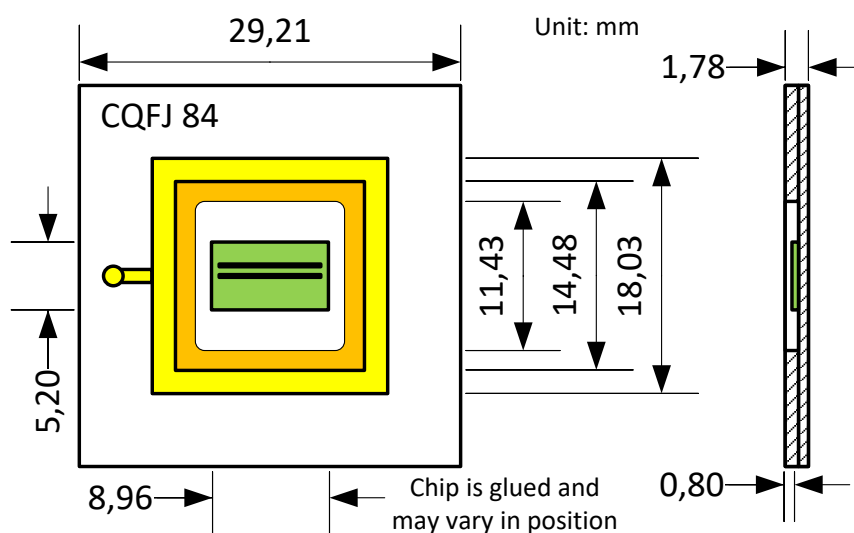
CQFJ 84 package with chip in the middle (dimensions)
